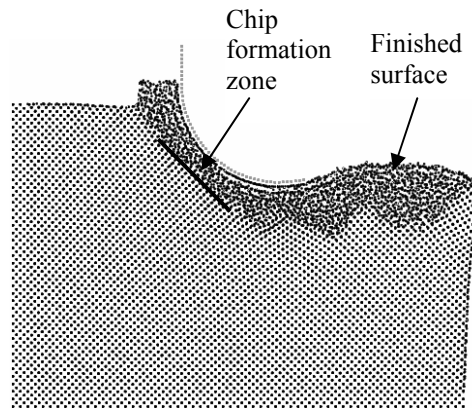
The silicon workpiece deformation when the tool cutting edge radius  $R = 3.5$  nm and the undeformed chip thickness was  $a_c = 2.8$  nm.
